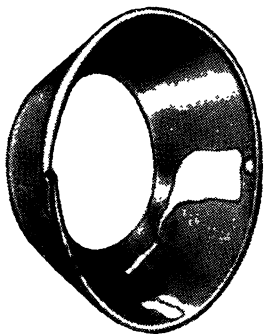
Cracking of a brass article after deep drawing and storage
